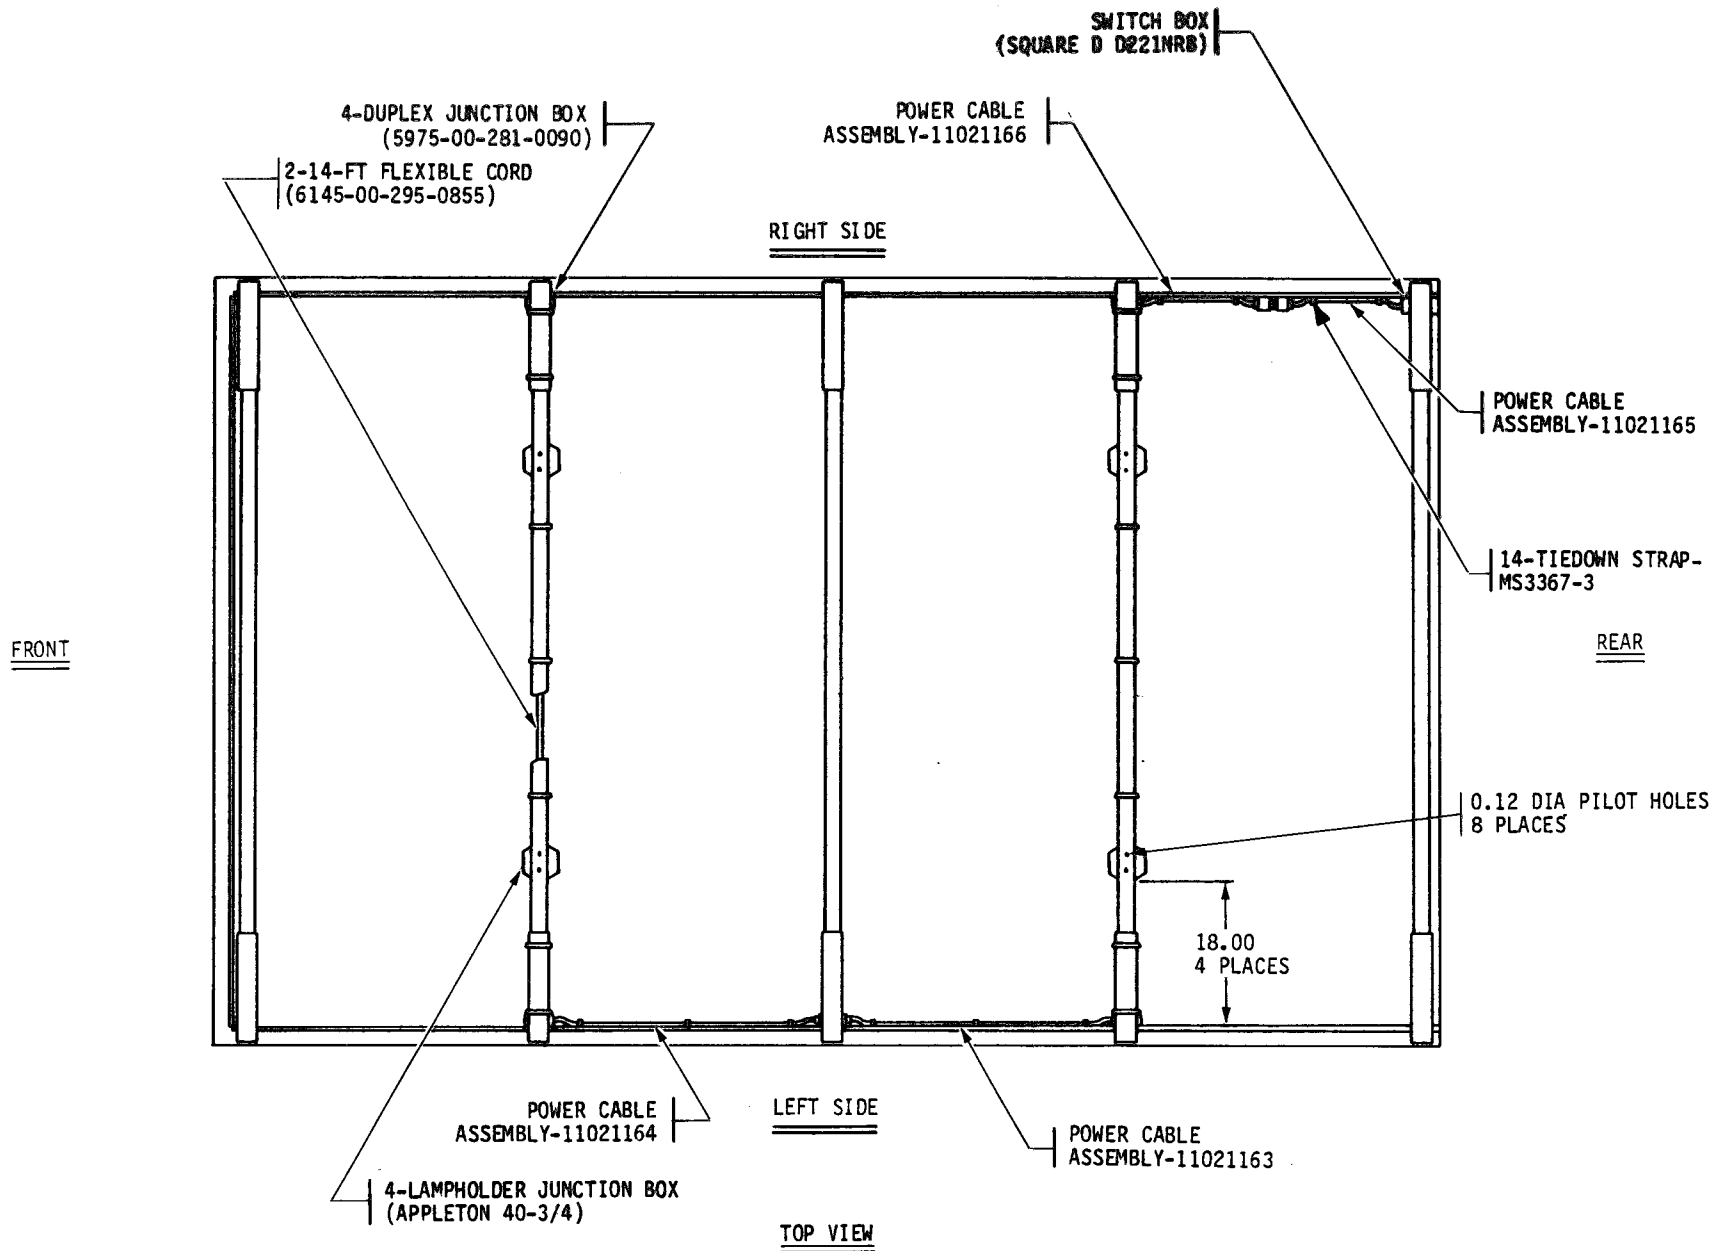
Electrical components to be mounted, unit 2, M35A2, top view.
